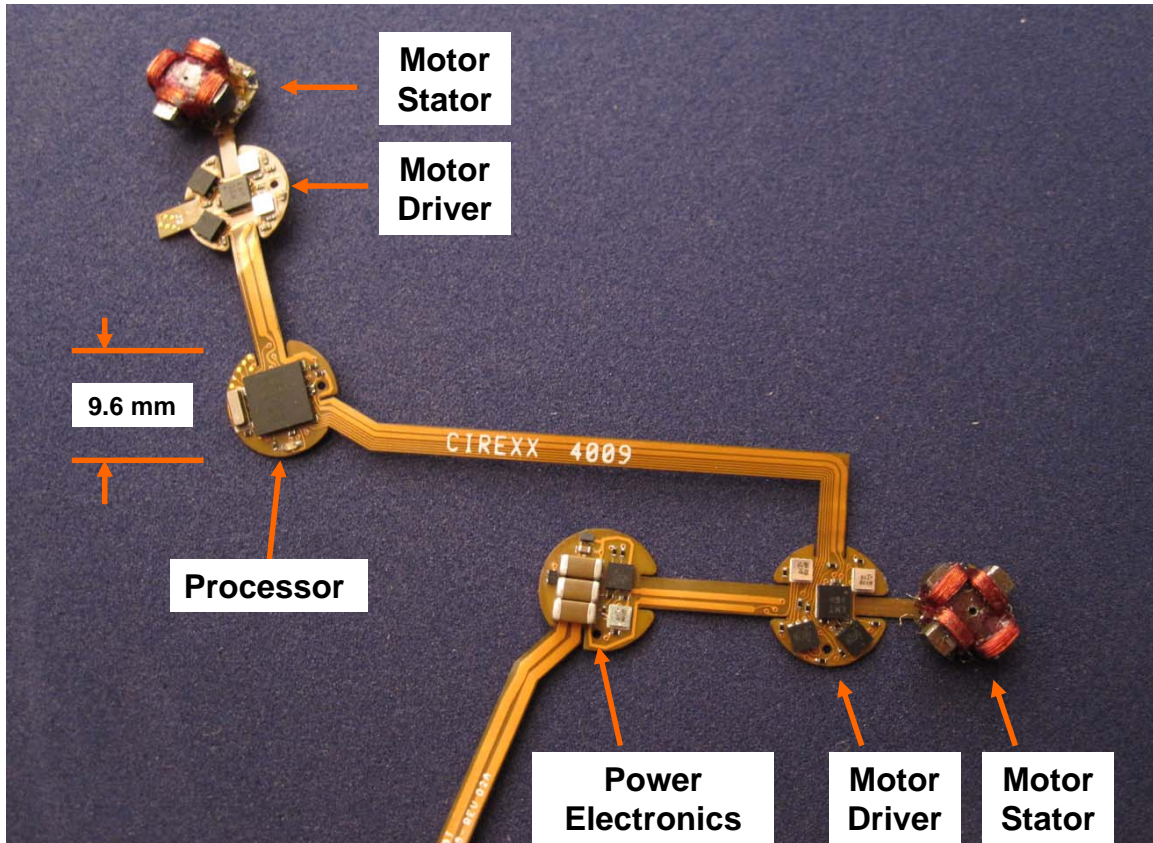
Millibot flex circuit. The circuits link together in a continuous reflow-soldered chain. Shown is the electronics to drive two joints: one microcontroller, one power electronics board, two motor driver boards, and the stators of two motors.
